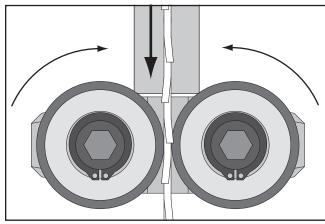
Blade guide bearings evenly and lightly touching the sides of the blade.
